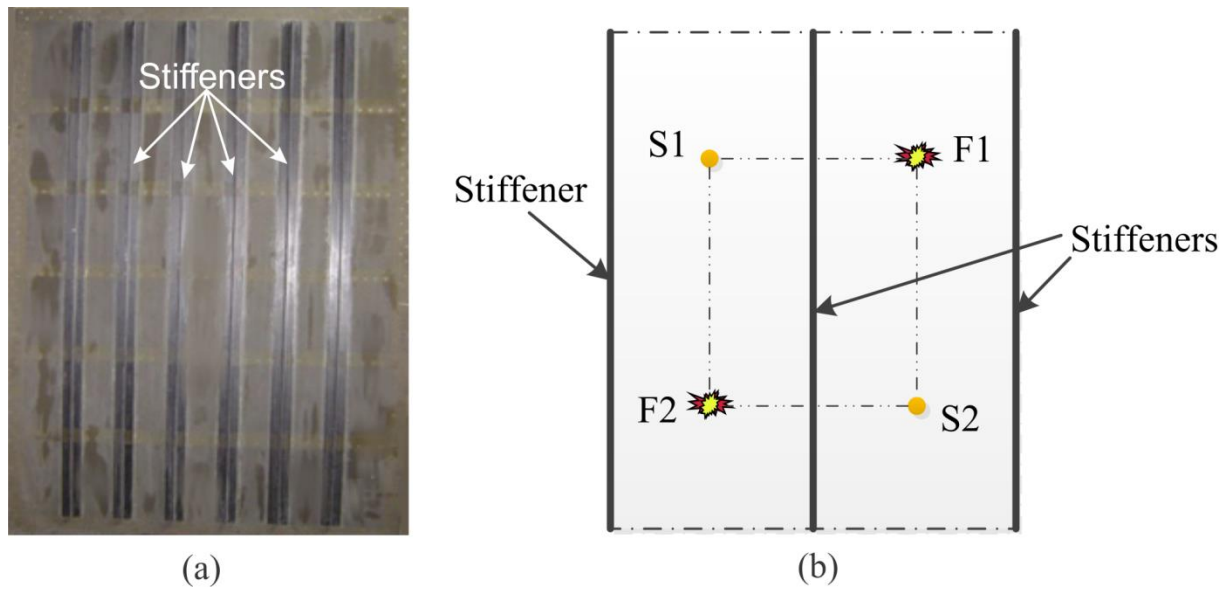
Asymmetrical sensor layouts on a real aircraft panel component with multi-stiffeners: (a) a complex structure component with multi-stiffeners, (b) asymmetrical sensor layouts on the panel structure.
